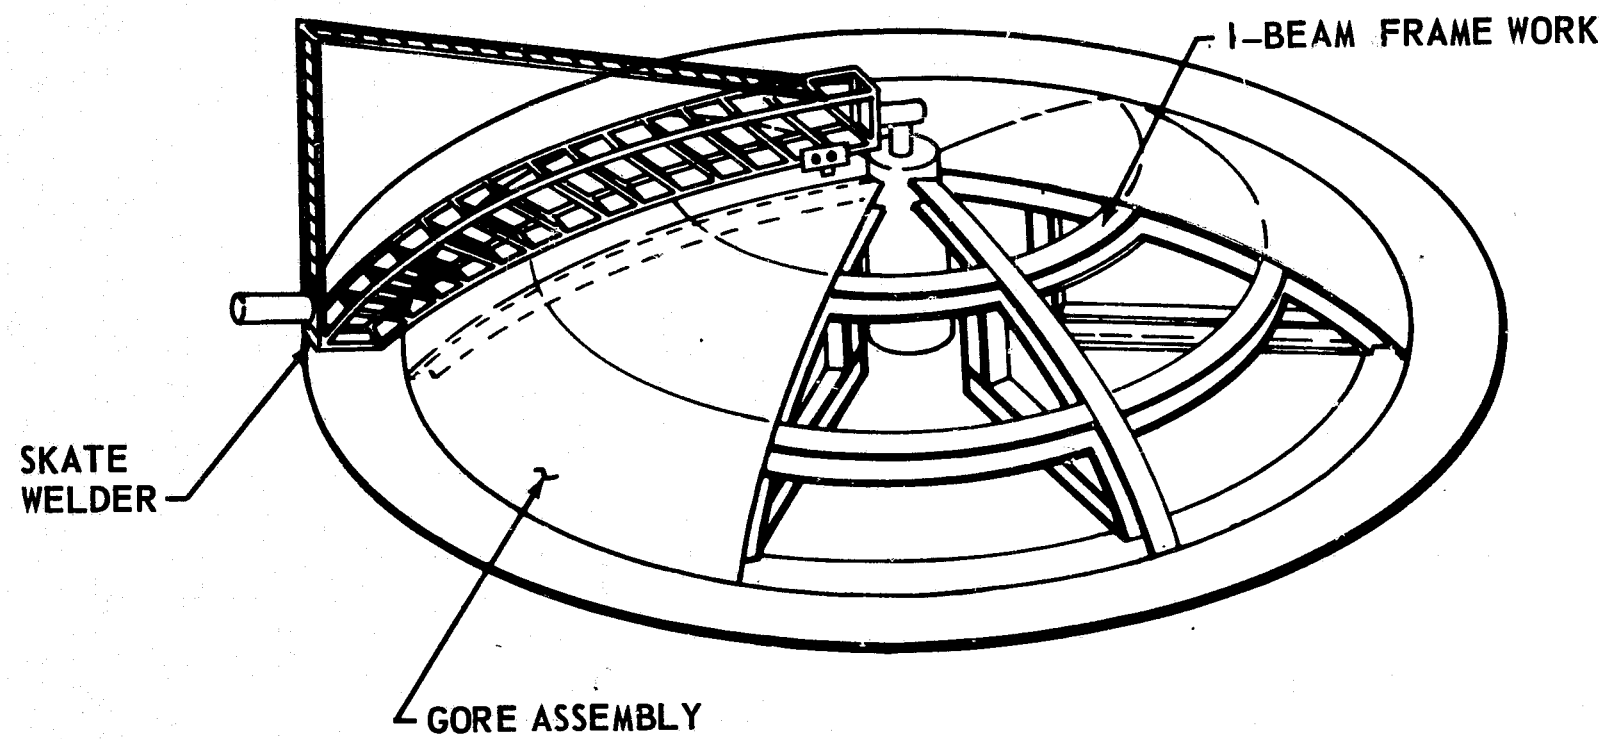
BASE STRUCTURE - BULKHEAD WELD FIXTURE
